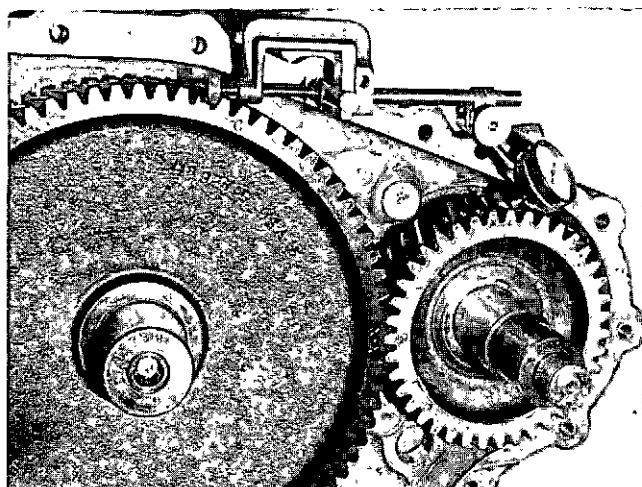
, V414148. Check drive gear to camshaft gear backlash
